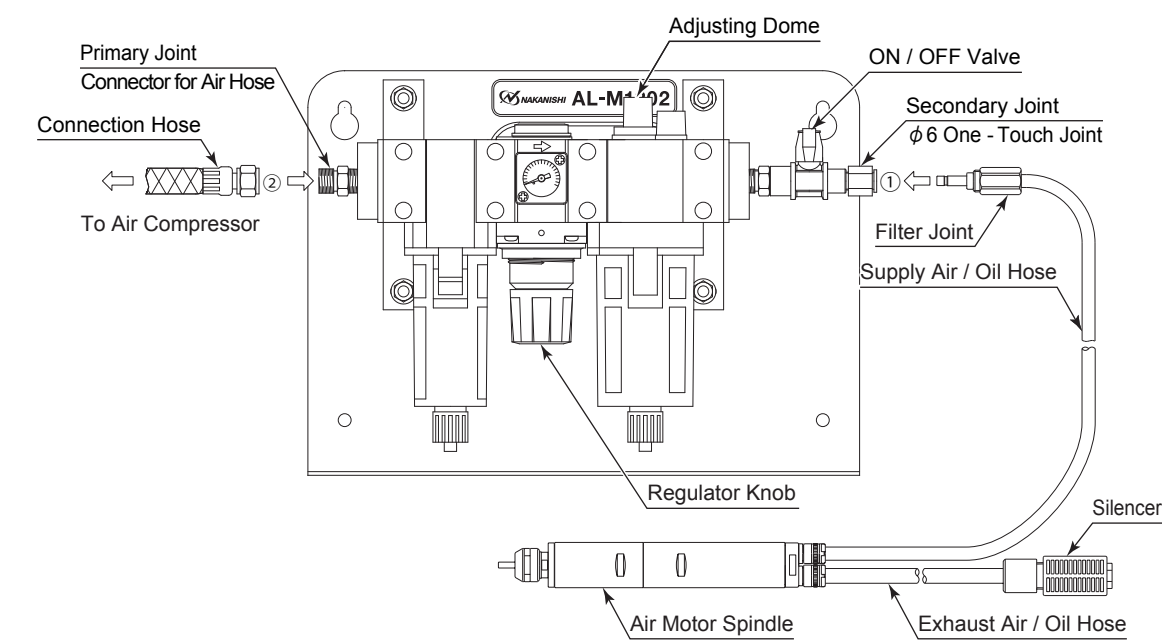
Connection of Air Line Kit " AL - M1202 (Sold Separately) "
